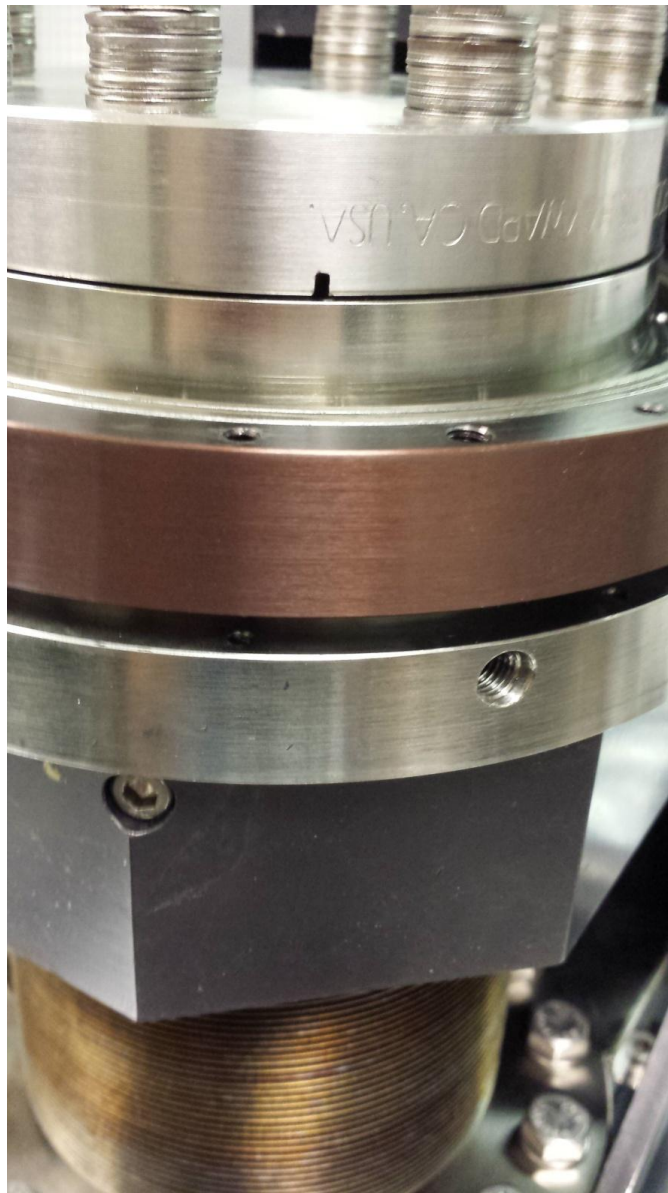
Close-up image of the side of the DPRF 450 that shows the bearing and bearing retainer ring being replaced. The bearing and bearing retainer ring should be replaced by exerting uniform pressure around the ring and the bolts holes should be aligned as well.
